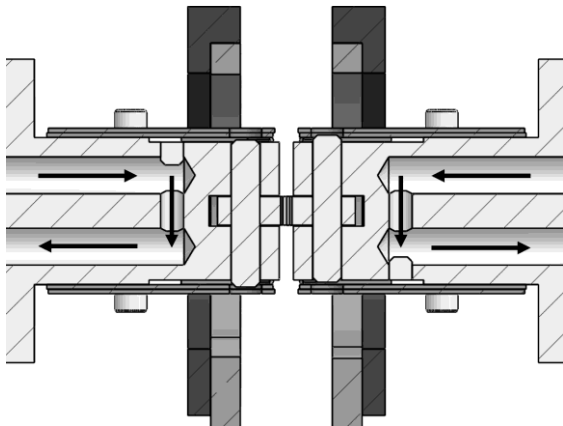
CAD design of the clevises inside the heating coils, with a CT sample mounted.
